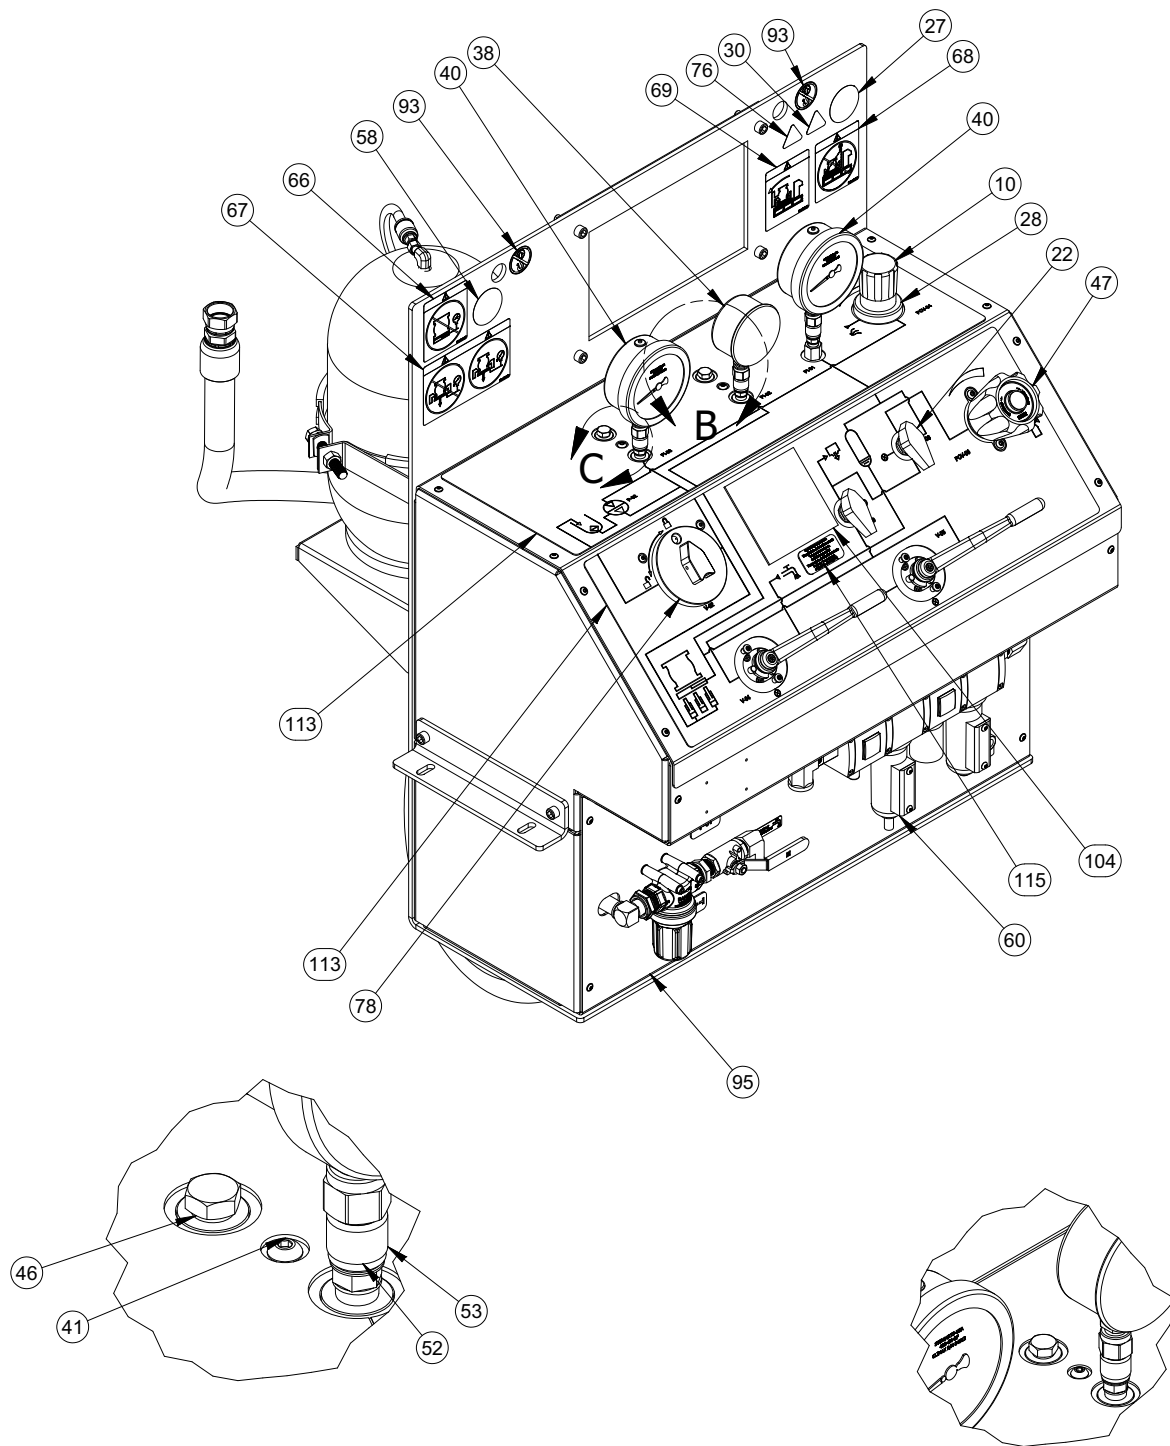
TAT-SRV ASSEMBLY WITH HYDRO PARTS LIST (P/N 98222)
